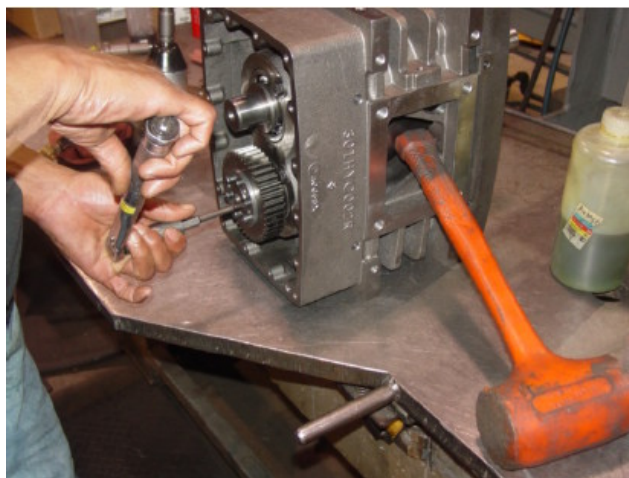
TIGHTEN GEAR LOCKING SCREWS
